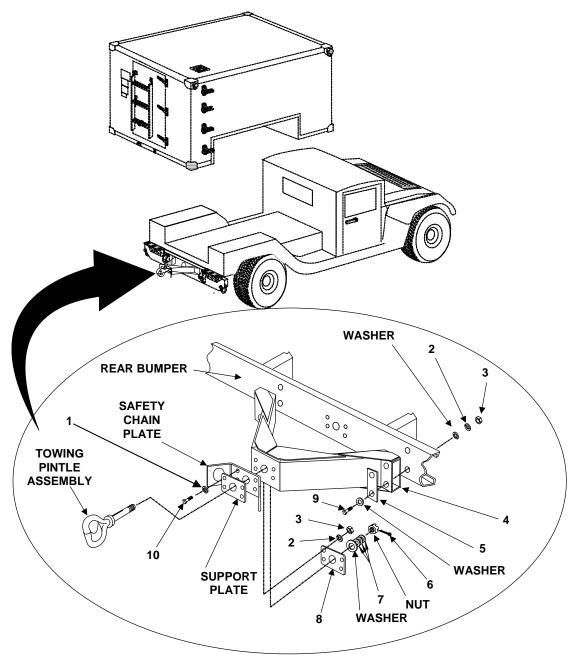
Shelter Mounting Assembly - Rear Brackets (Sheet 2 of 2).
